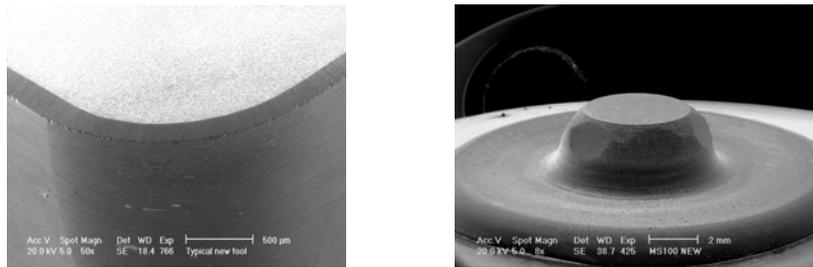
CBN cutting tool (left) and PCBN FSP tool geometry (right).
